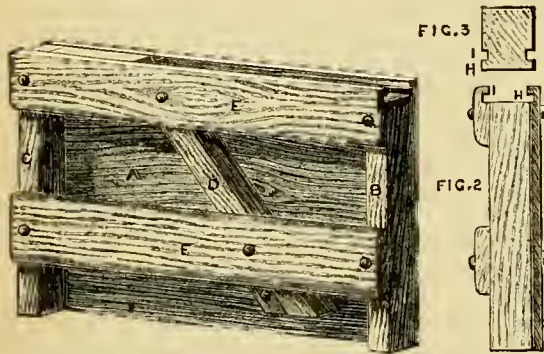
MITRE PLANER, COMPLETE. FIG. 2.—END VIEW OF MITRE PLANER. FIG. 3.—END VIEW OF PLANE.
